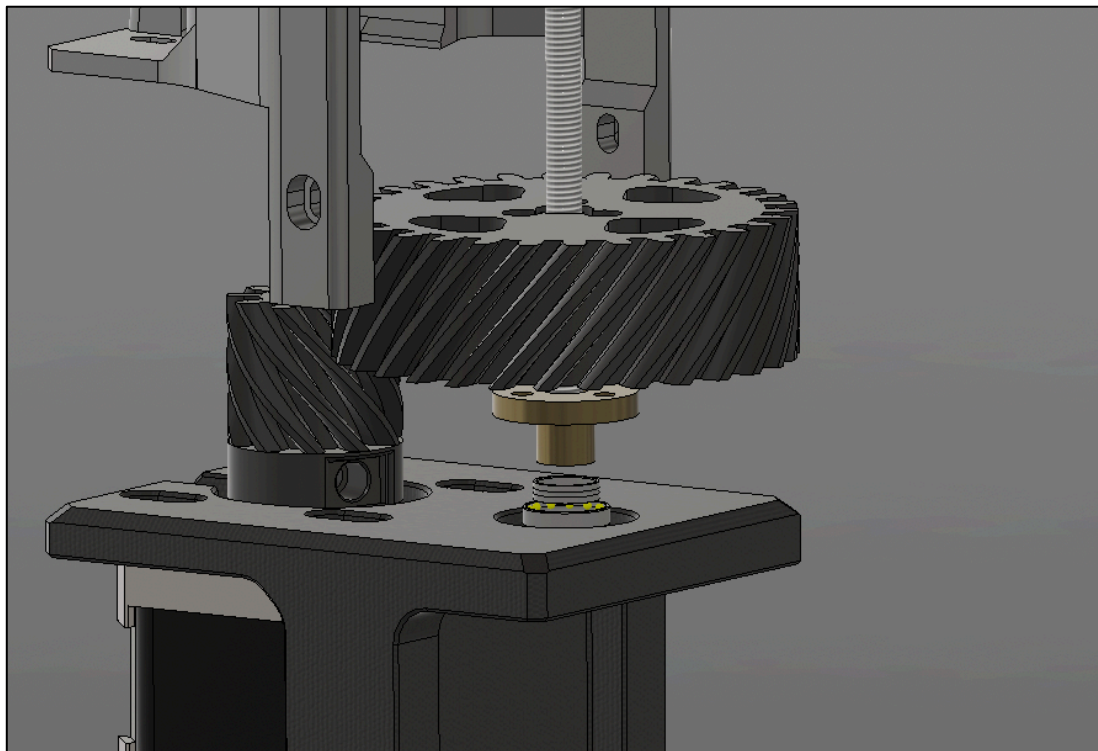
Move gear connection with lead screw nut, lead screw, and ball bearing for optimum alignment and friction minimization
